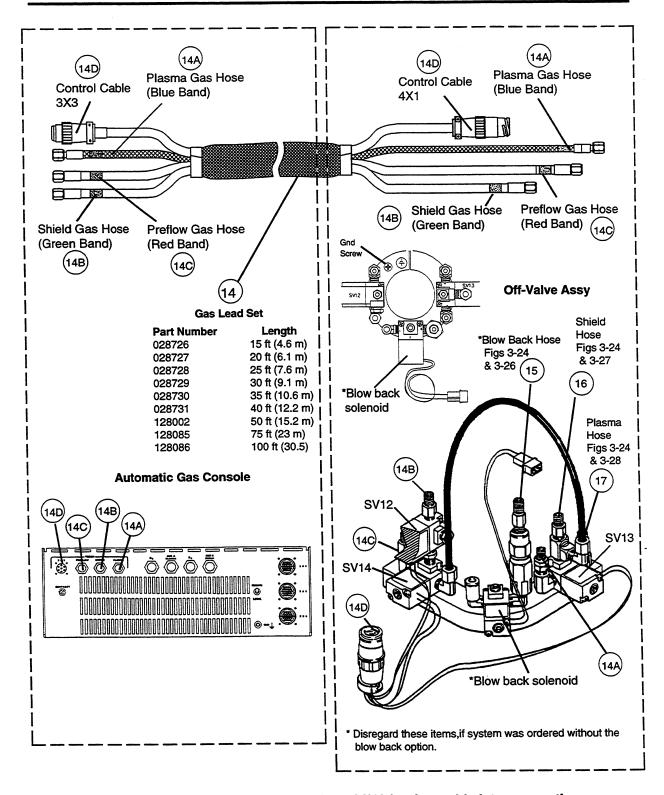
Automatic Gas Console to Off-Valve Assembly Interconnections
